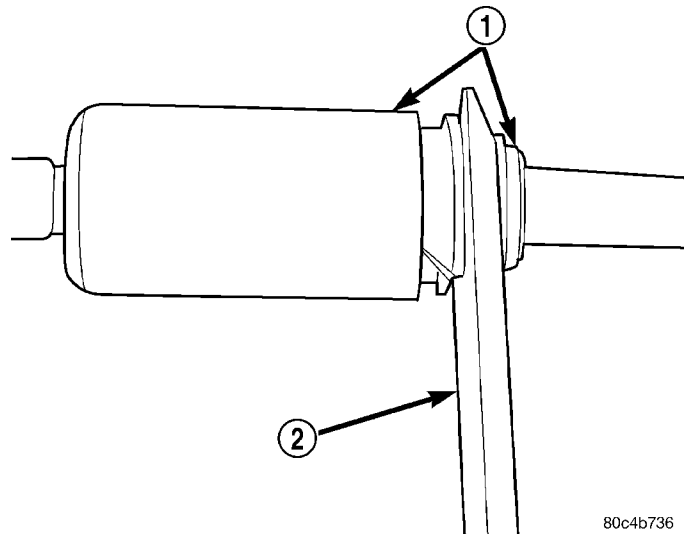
Disconnect Hydraulic Circuit Using Tool 6638A
